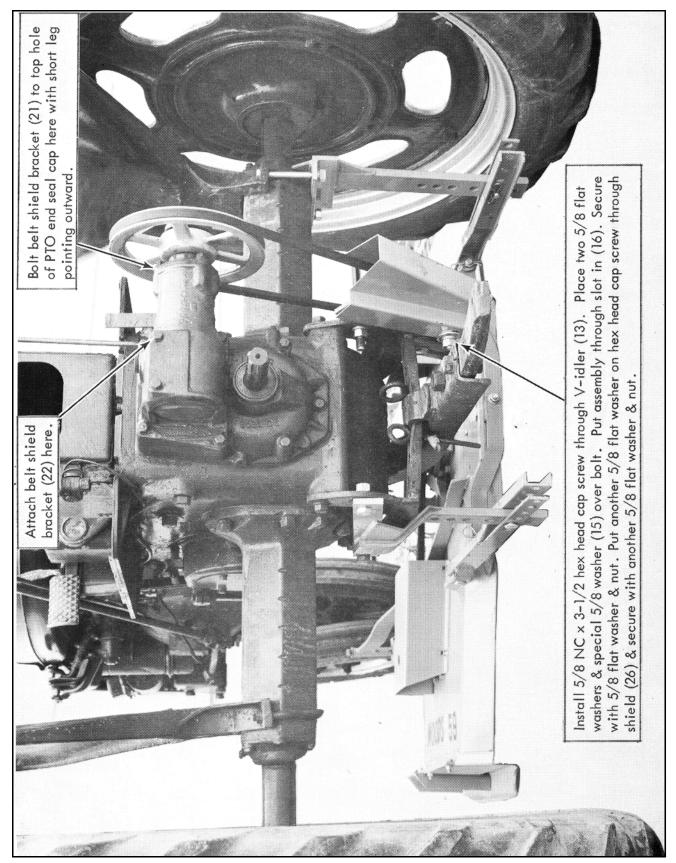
59-HC Idler and Mounting Bracket Assembly
